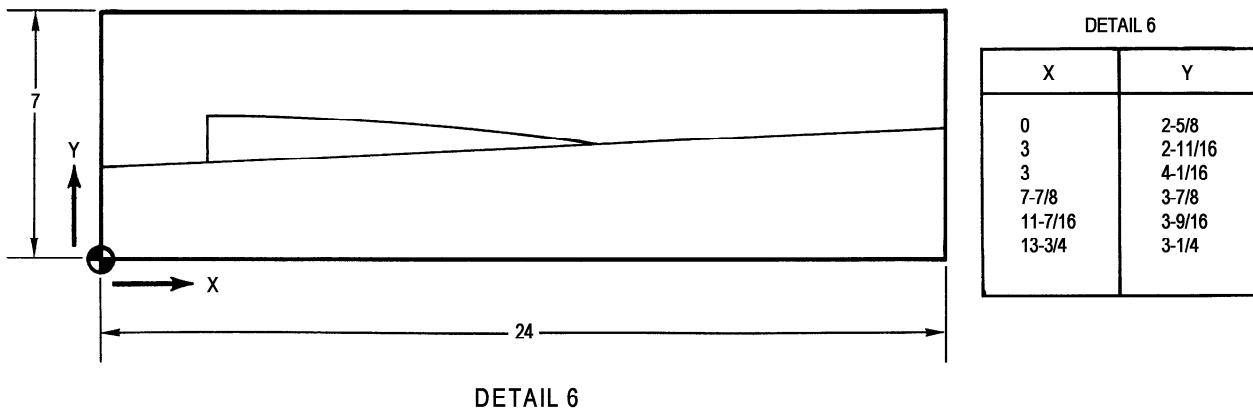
Wing Torque Box Upper Fairing Shipping Container (Sheet 2)
